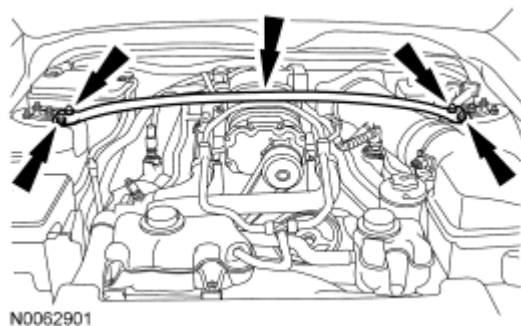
Locating Strut Tower Cross Brace & Nuts
